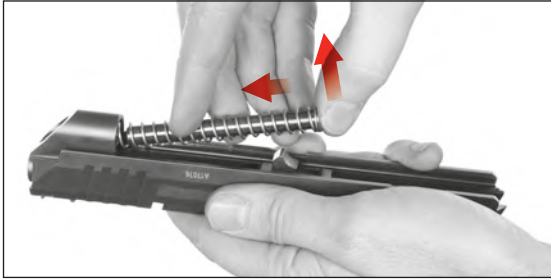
Removing the recoil spring assembly. Caution: spring under tension!
